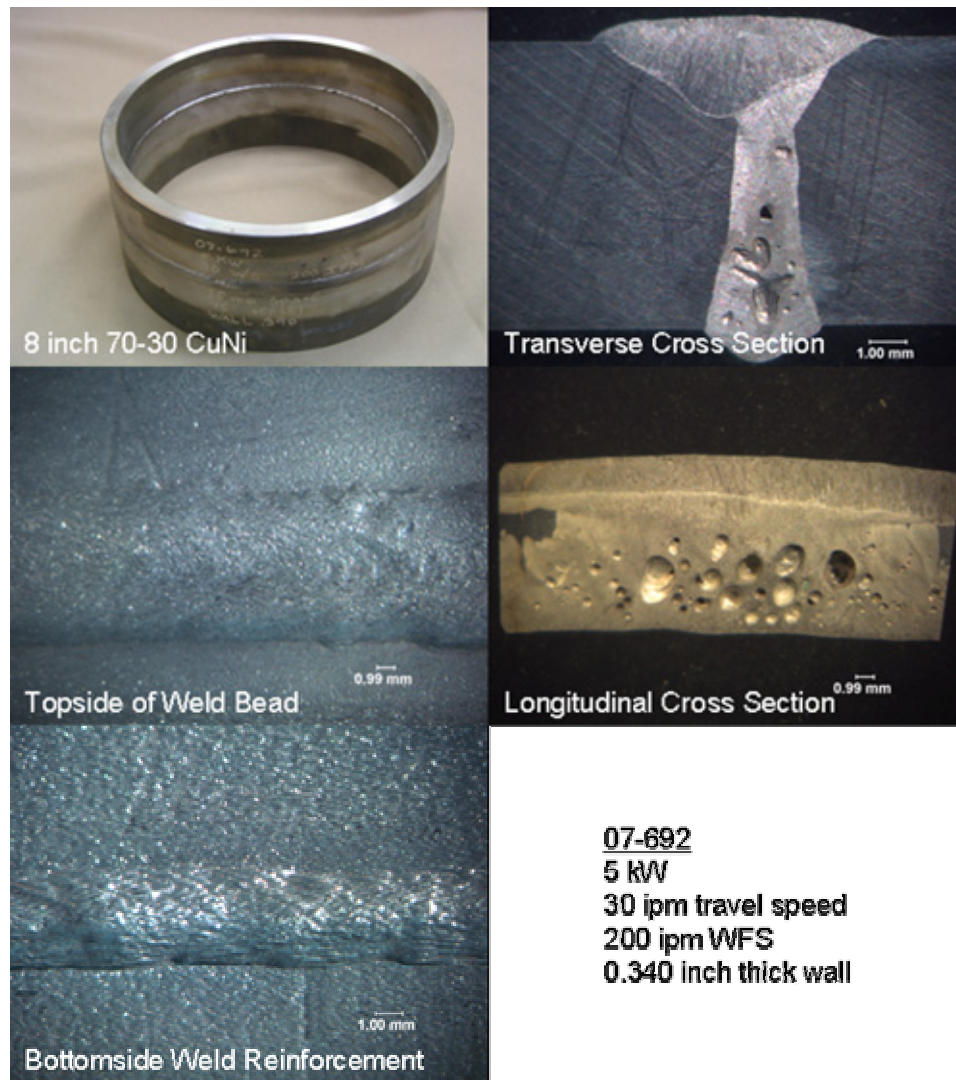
Tandem hybrid weld of 8 inch 70-30 CuNi pipe.
